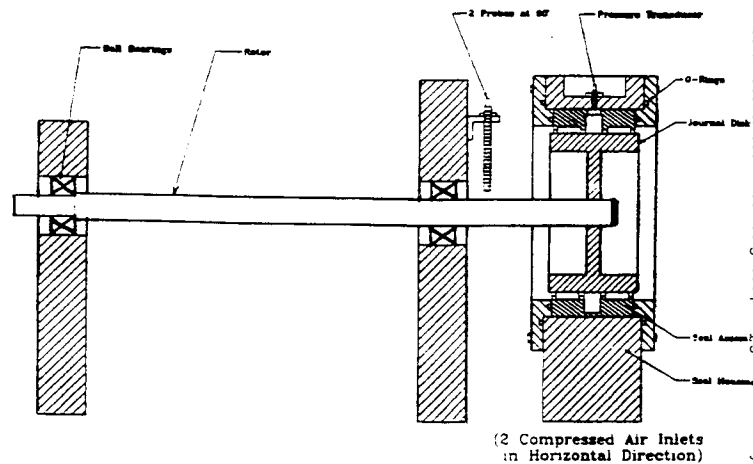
CROSS-SECTION OF DAMPER SEAL TEST RIG.
